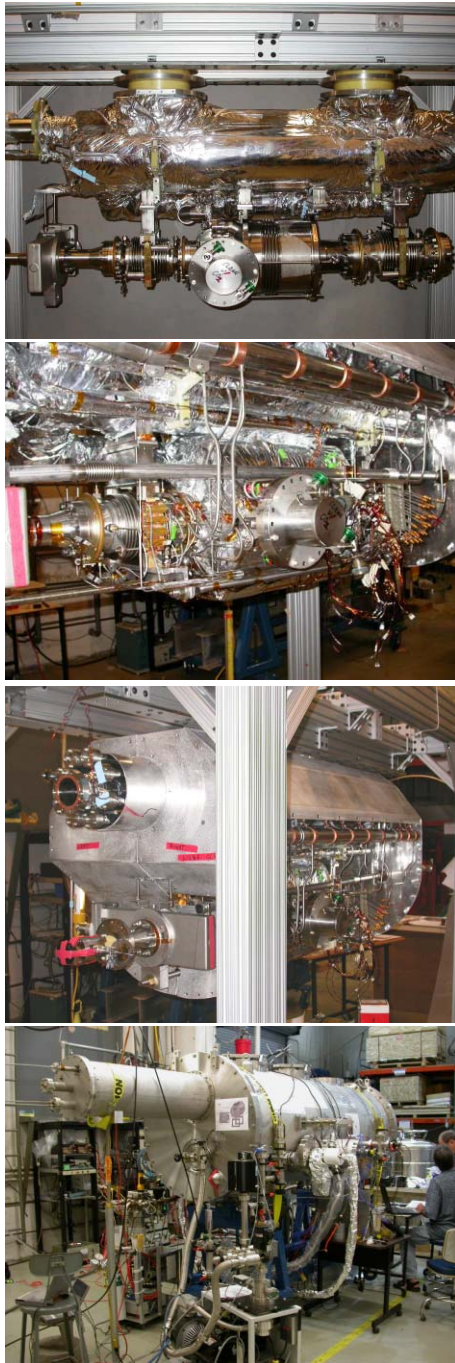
HTC module assembly. Top: Beam line string supported by HGRP. Second from top: After adding of 5K and 80K tubing. Third from top: Nearly closed 80K shield. Bottom: Finished cryomodule.
